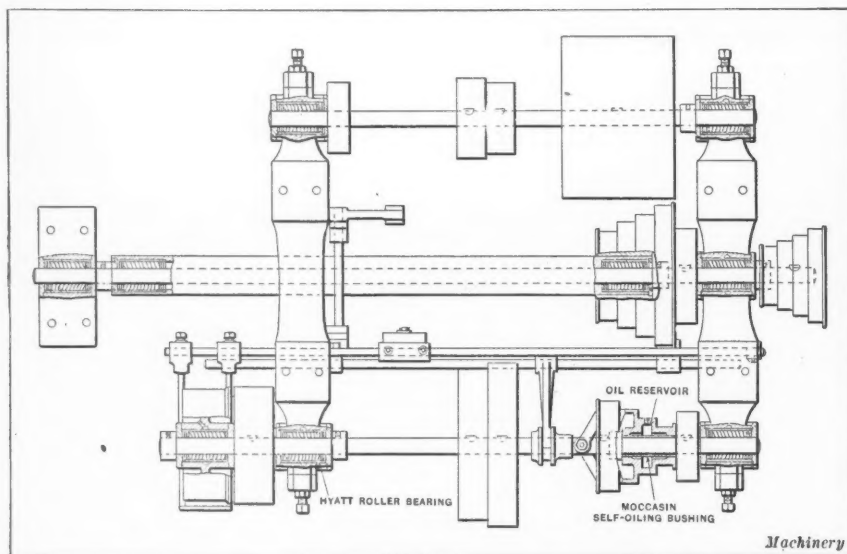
High-speed Countershaft for driving Grinding Machine. Here Roller Bearings are of Particular Value in reducing Power Losses and Wear
